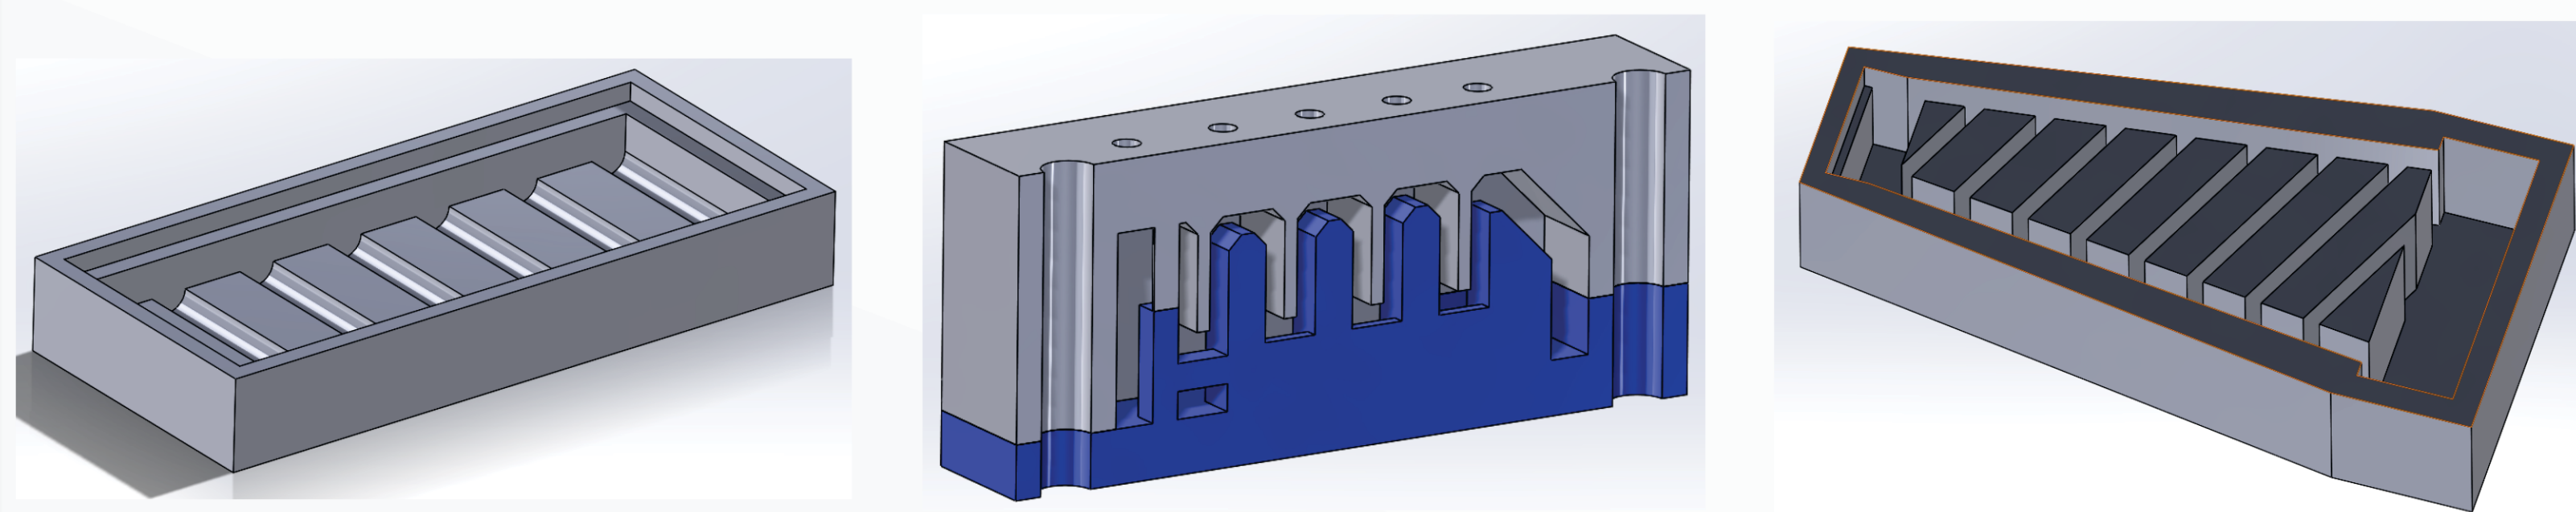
3D printed molds used for silicone casting of flexible gripper fingers.
